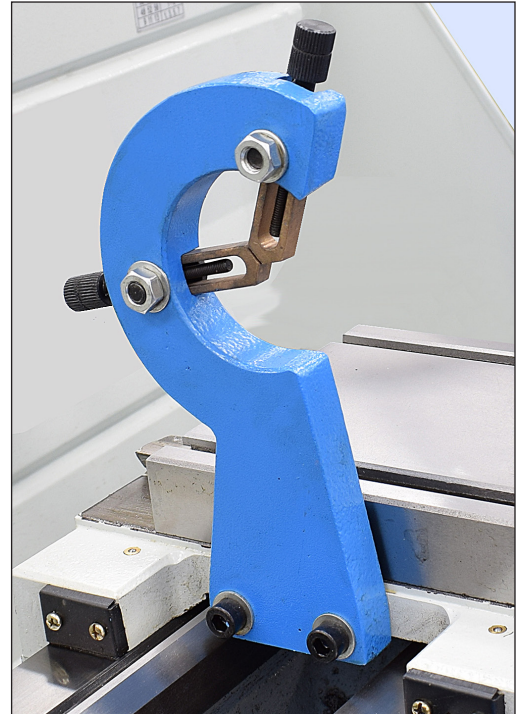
Follower rest Maximum diameter 2-1/2 in.
